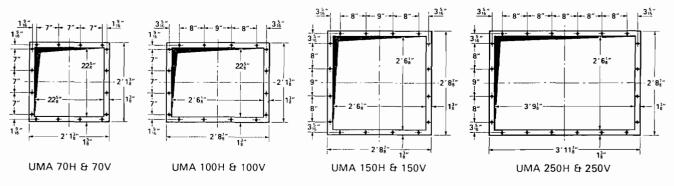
Aperture and mounting-flange dimensions for Hopper and Venting type units
